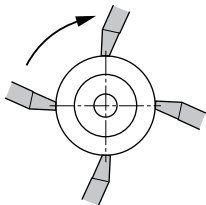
Checking the axial alignment with a calliper gauge – circumferential check
